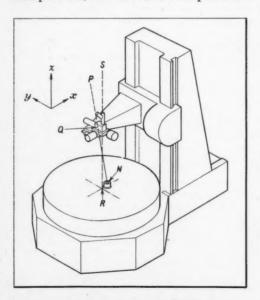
Mercury Rodolite set-up on a hobbing machine for checking column and table-axis alignment
